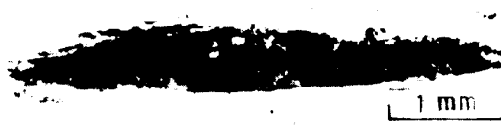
Typical sliver defect on the laboratory cold rolled sheet
